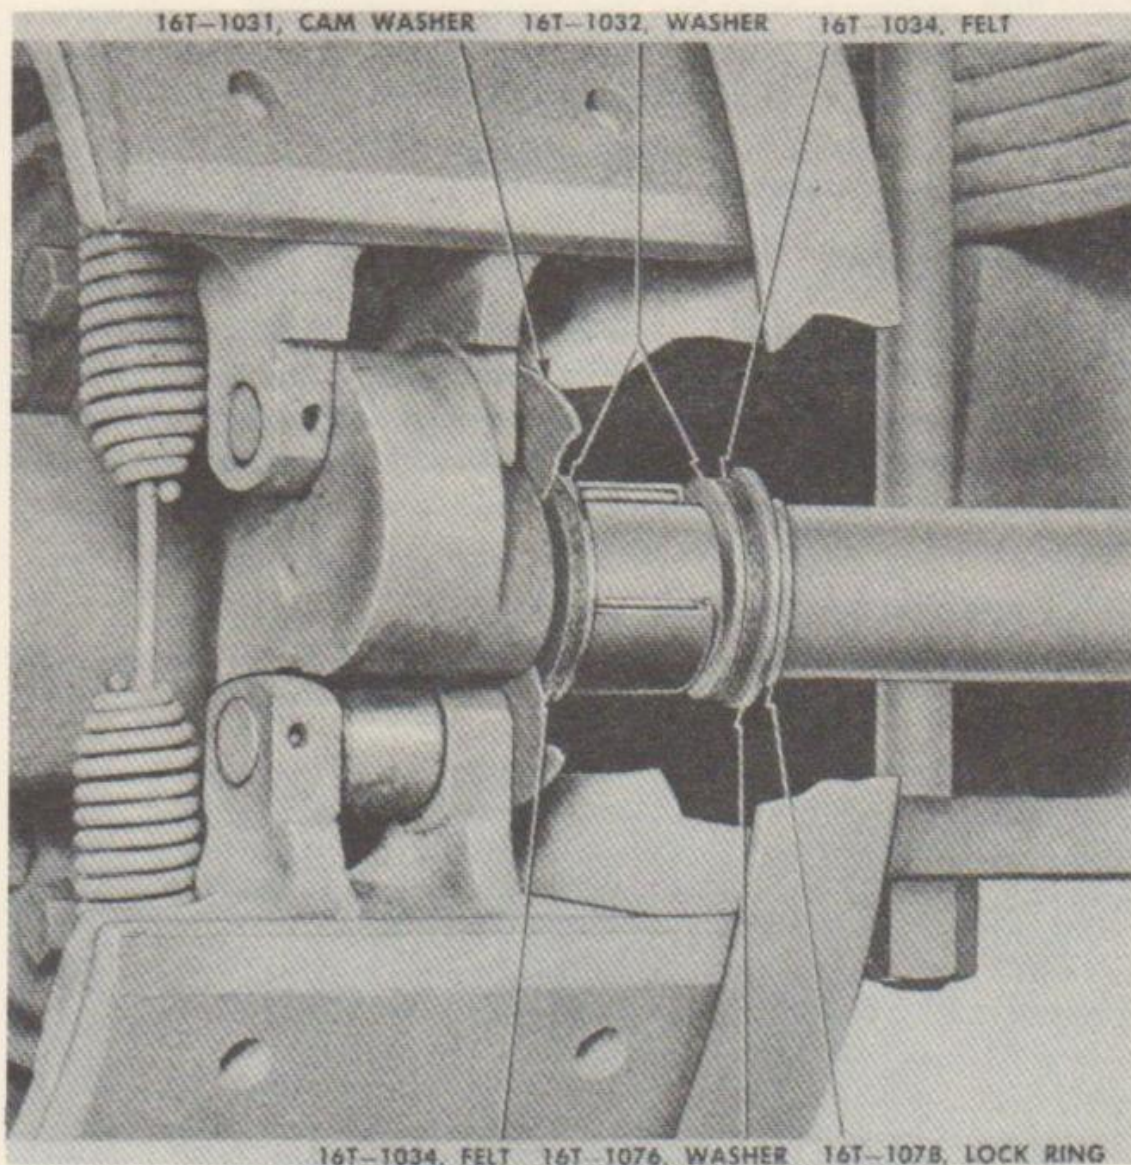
SECTIONAL VIEW OF CAM INNER PARTS
